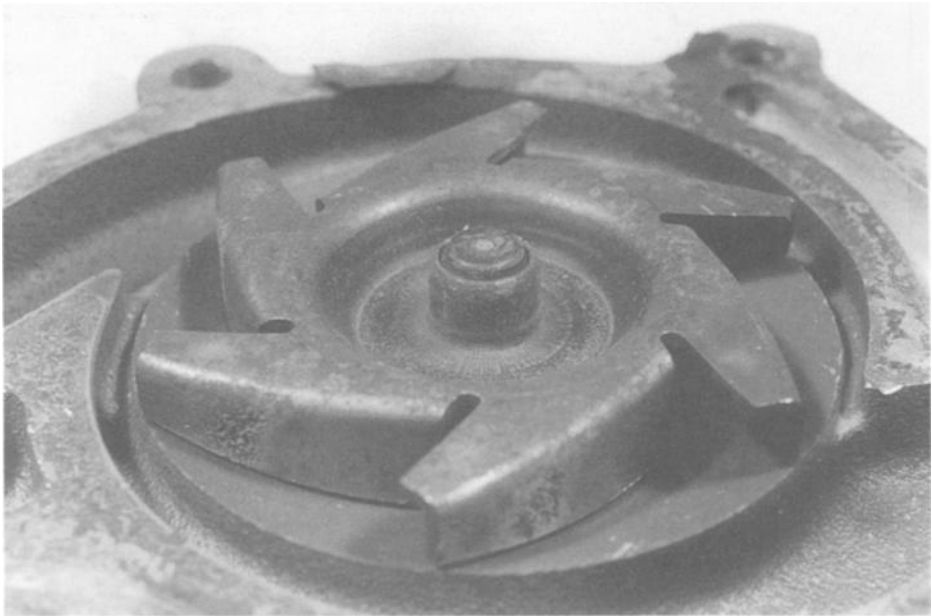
Cavitation damage to steel impeller.
